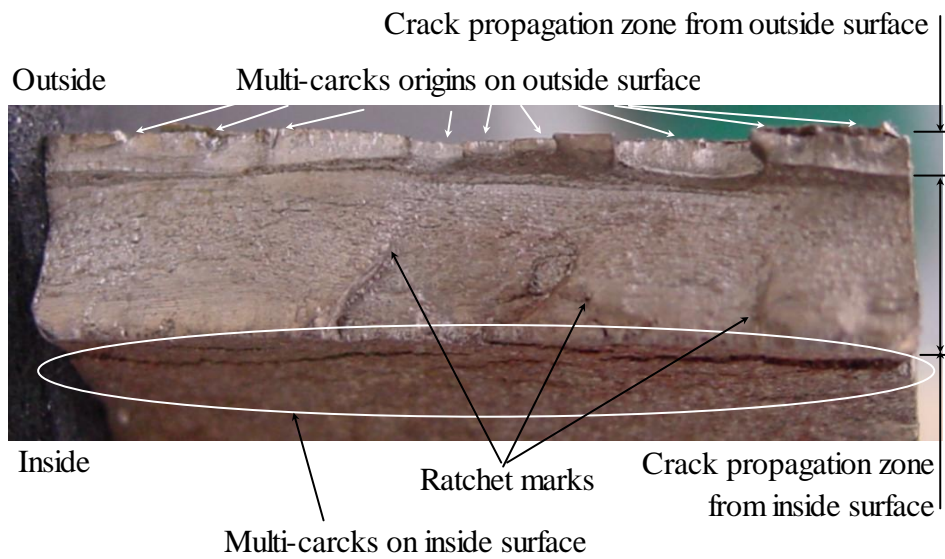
Fracture surface of wrinkle on concave side (specimen LCF20N1)
